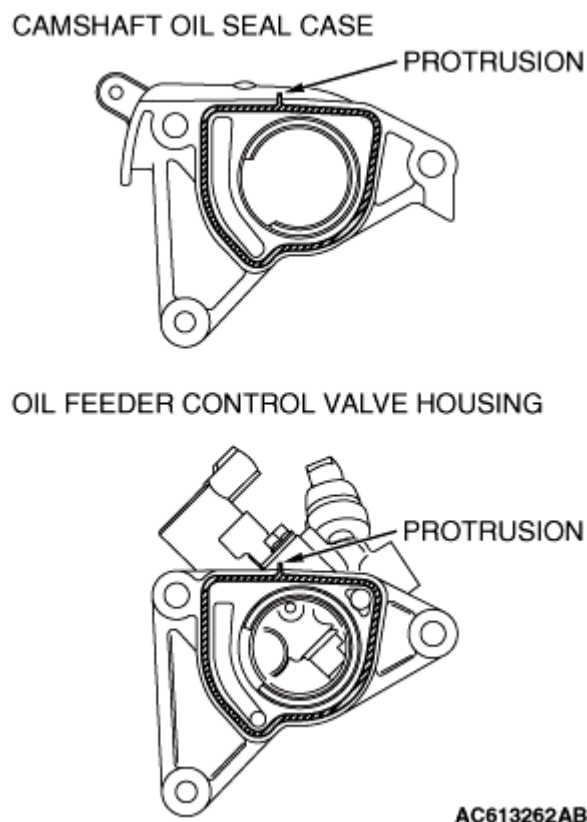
Identifying Camshaft Oil Seal Case And Oil Feeder Control Valve Housing
